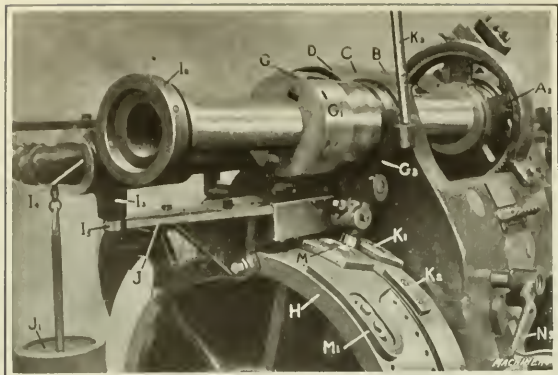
End View of Gridley Single-spindle Automatic Turret Lathe, showing Cams for opening and closing Chuck and advancing Turret Slide, also Cams for operating Stock Pusher
